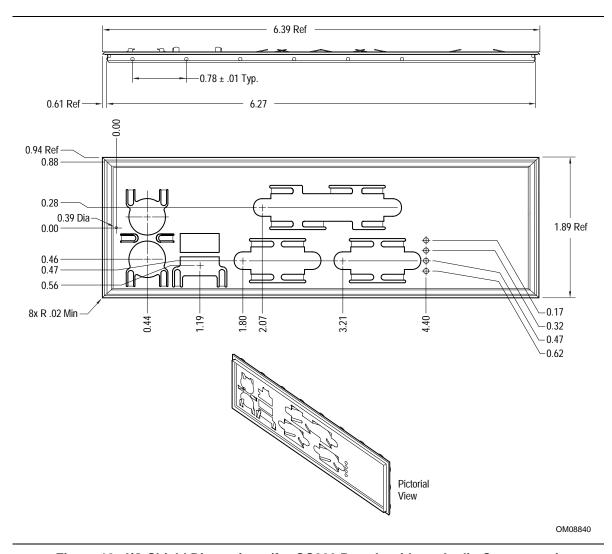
I/O Shield Dimensions (for CC820 Boards without Audio Connectors)
